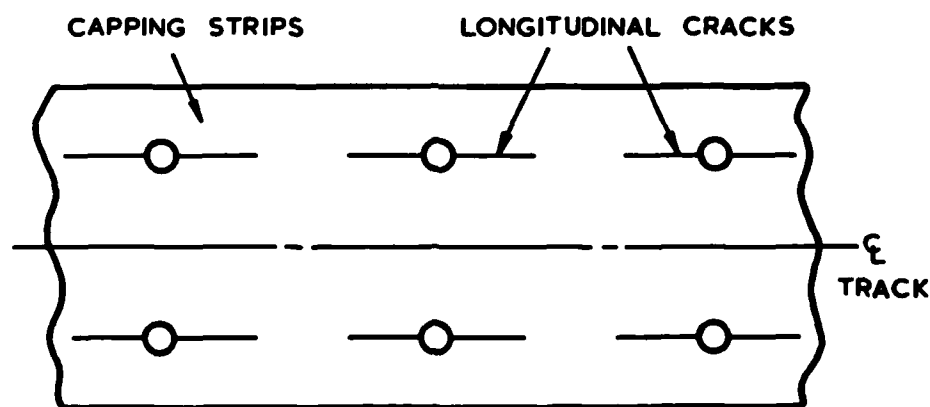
Cracking between fastener holes in capping strips (BAe, Manchester)
